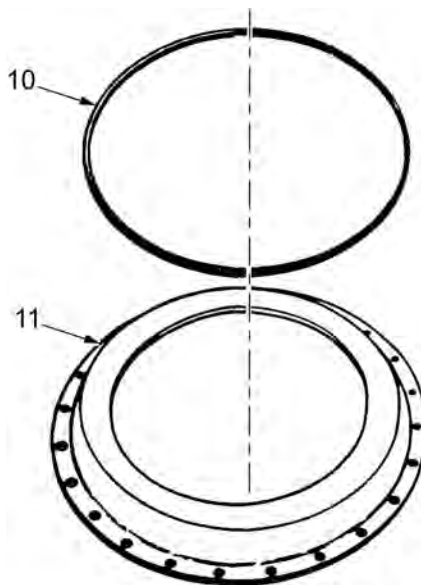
Seal Ring Installation on Clutch Backing Plate.
